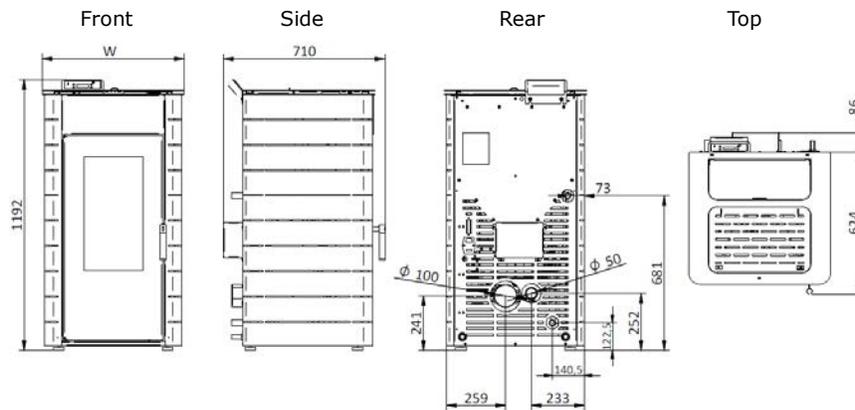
Dimensions of the free-standing pellet fire unit K1700 Table 2 - Dimensions of the free-standing pellet fire unit K1700
